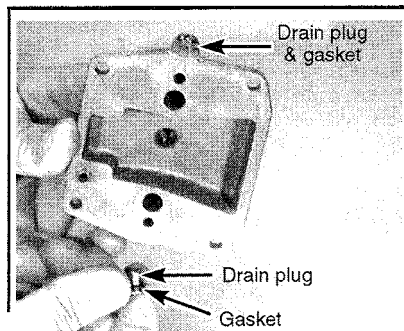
Remove the 2 float bowl drain-plugs and discard the gaskets (O-rings)
